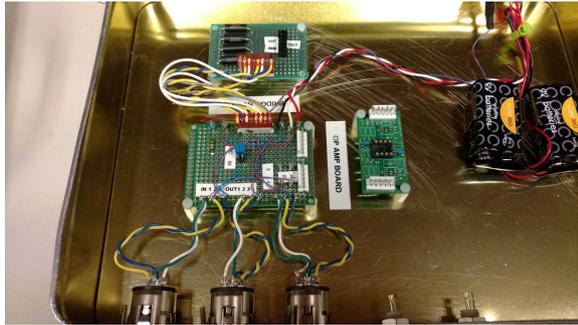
Test fixture cookie tin. Top PCB is resistor bridge board, XLR connectors at the bottom. Unused op-amp test board on right side.
